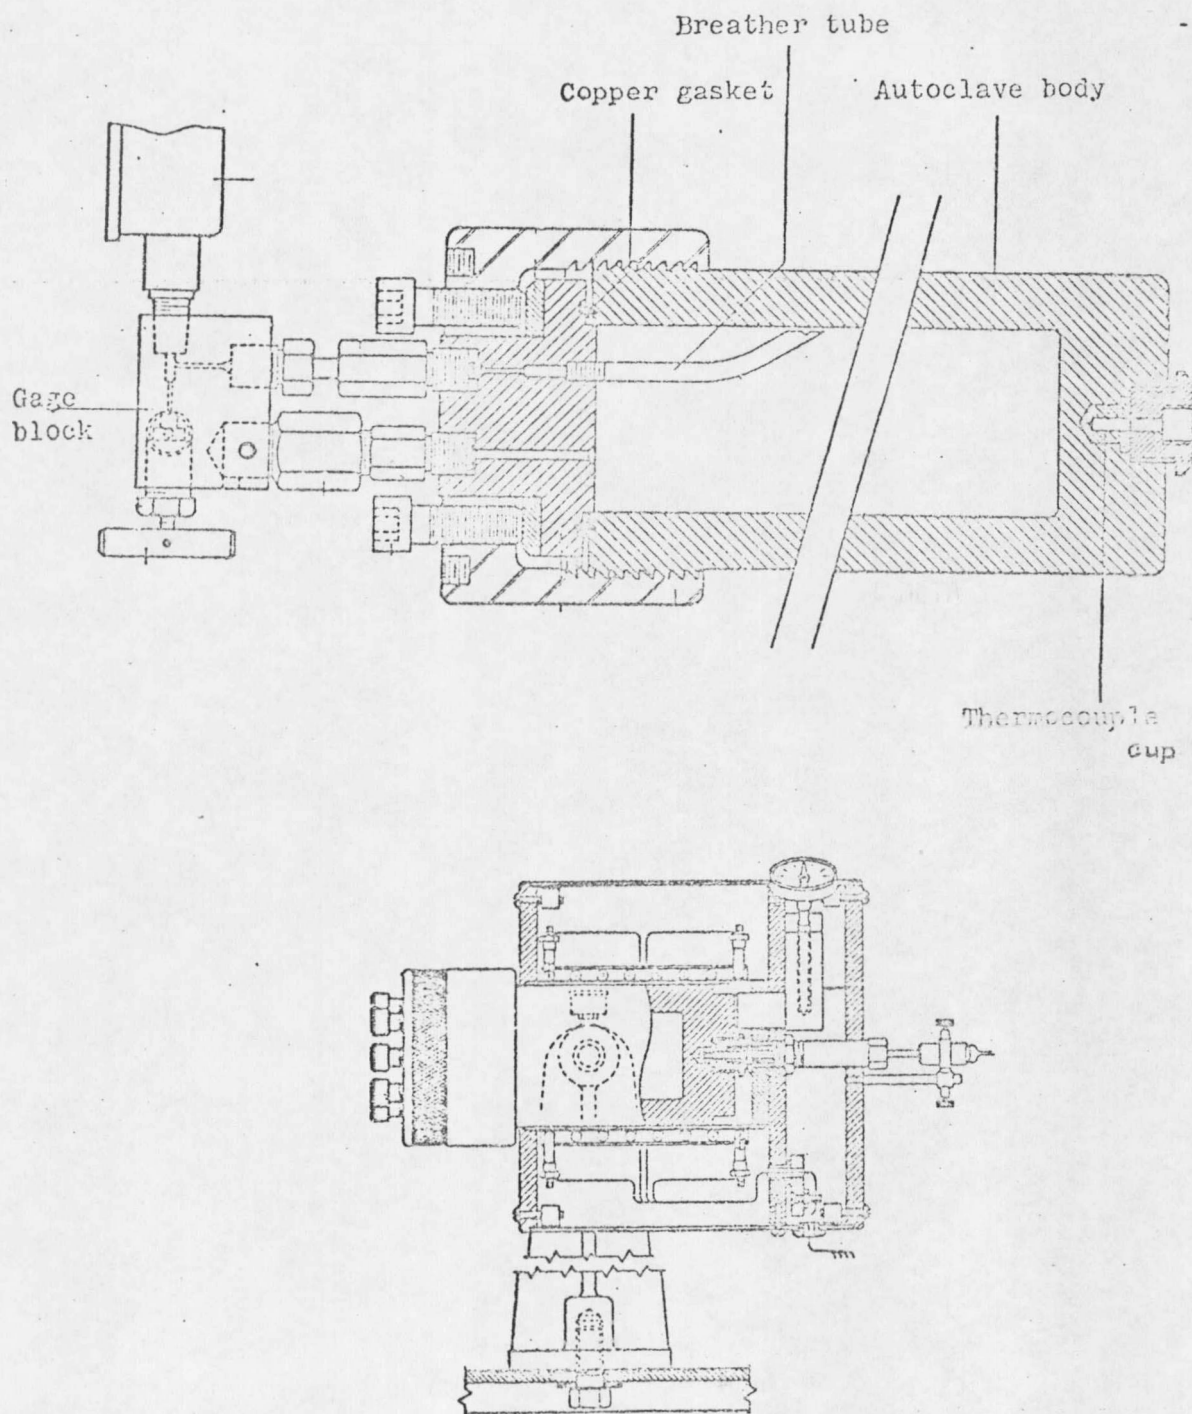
AUTOCLAVE AND HEATER DETAILS
